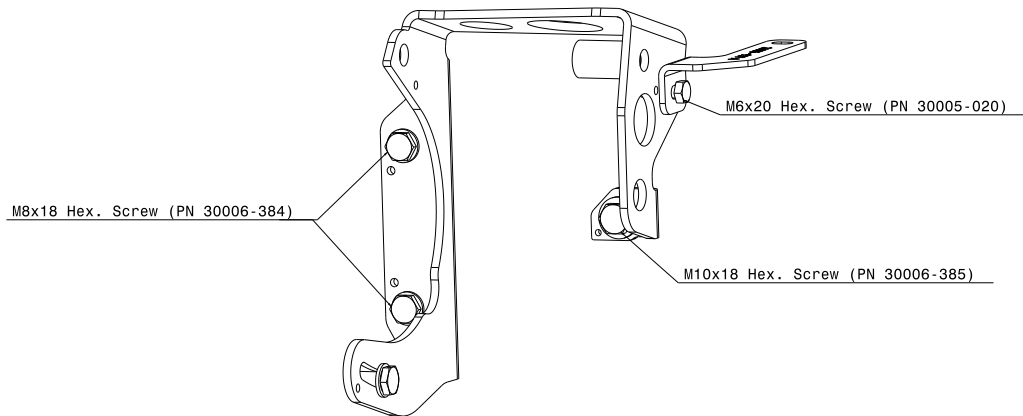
Isometric view Mounting Frame 20A 915iS
